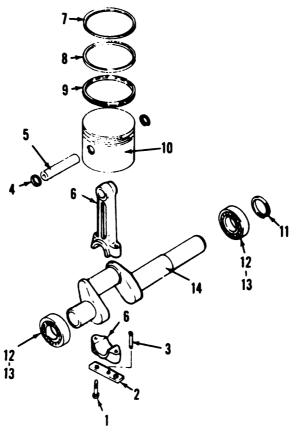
Crankshaft and correcting rod bearings, removal and installation.
